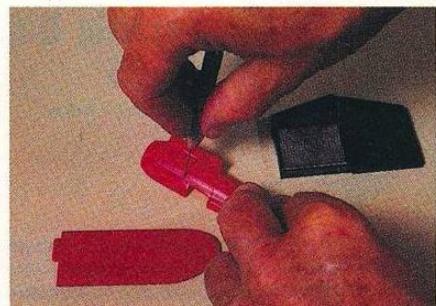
Holes for rigging were preplanned and drilled before parts were assembled.
